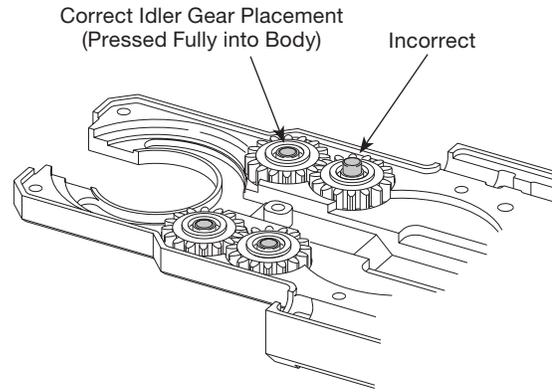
Correct Placement of Idler Gears in Micro Weld Head Housing
